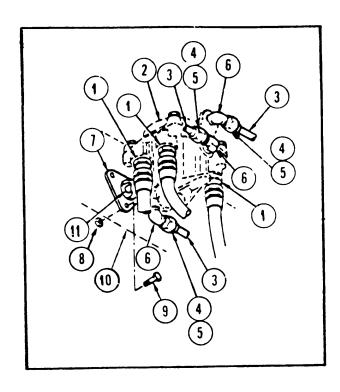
Trailer Relay Valve and Adapter Assembly (ARMY)
